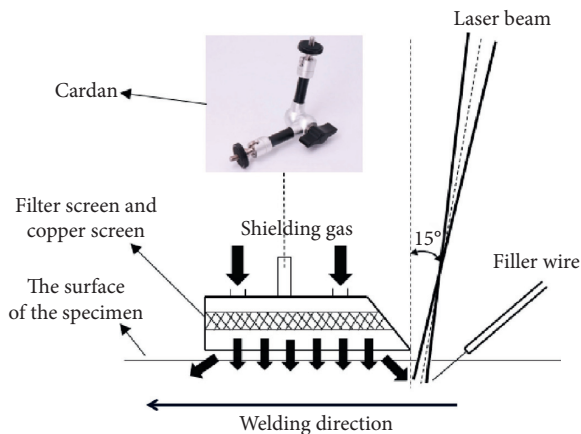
Experimental set-up of narrow gap laser welding.
